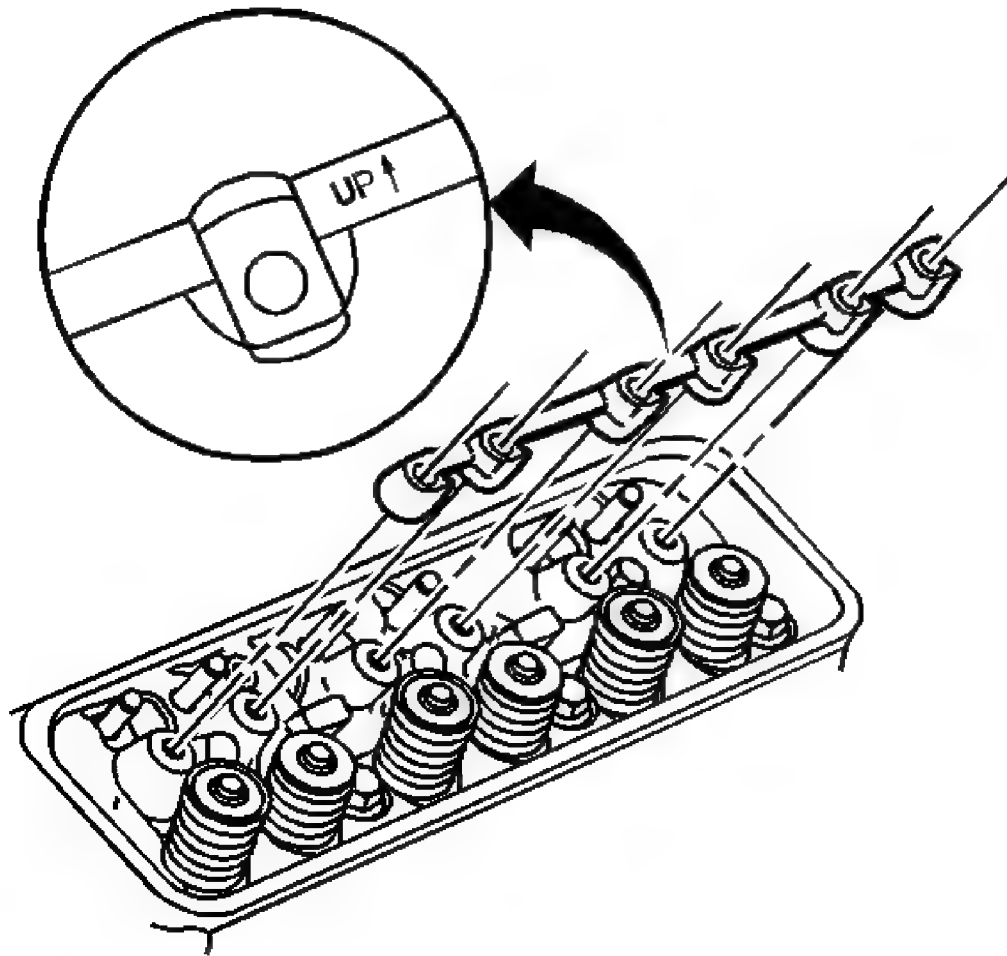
Locating Arrow On Valve Rocker Arm Support
